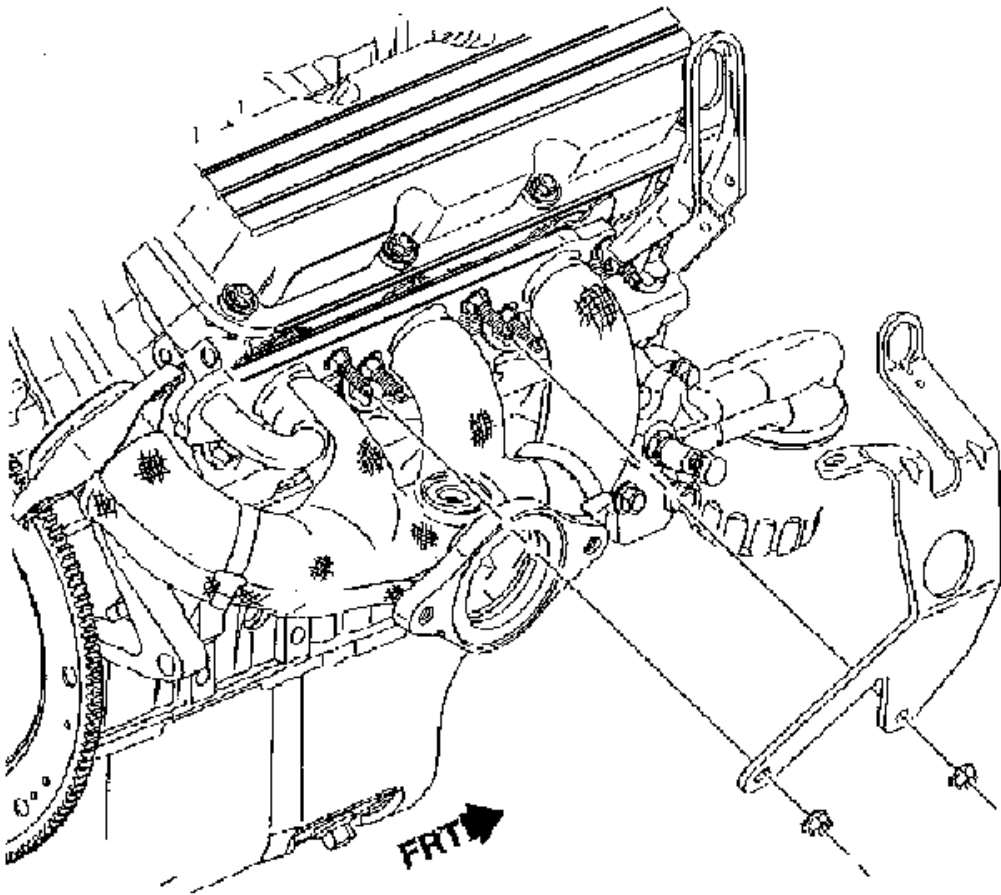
Removing Fuel Injector Sight Shield Mounting Bracket
